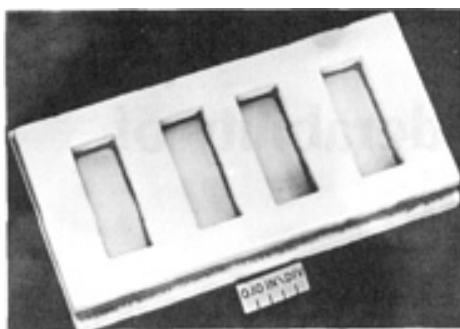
ALUMINUM OXIDE COMPARTMENTED ASSEMBLY VACUUM BRAZED WITH 49TI-49CU-2BE (IN WT%) BRAZING FILLER METAL AT 980 °C (1795 °F) FOR 10 MIN
